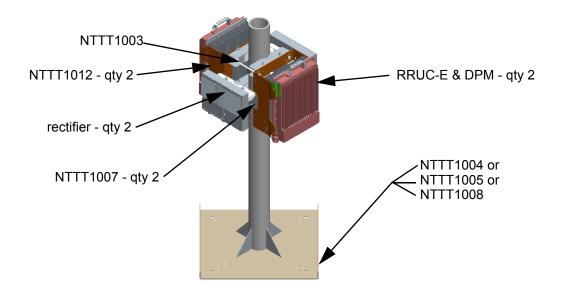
Floor/roof stand - with 2 RRUC-Es and 2 Rectifiers
